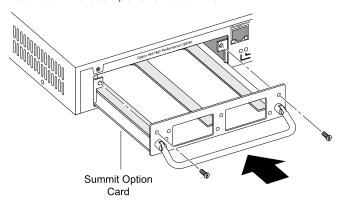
Installing a Summit Port Option Card (XGM-2xn Shown)
